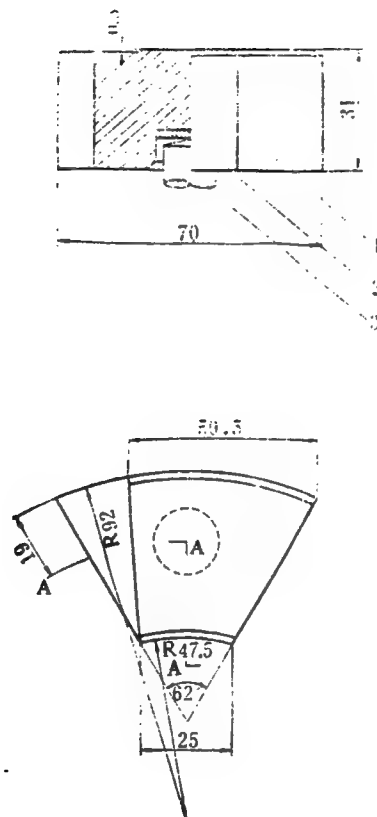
Tiles in the bottom thrust bearings. 1) graphite tile; 2) support shim; 3) support screw
